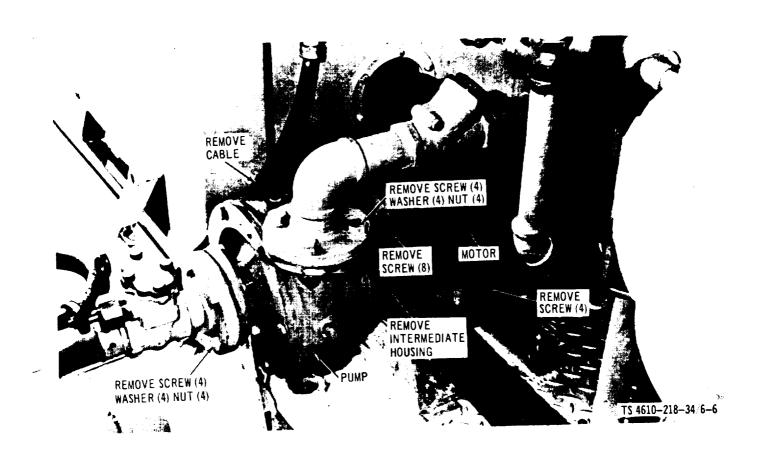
Diatomite Filter Pump and Motor, Removal and Installation
